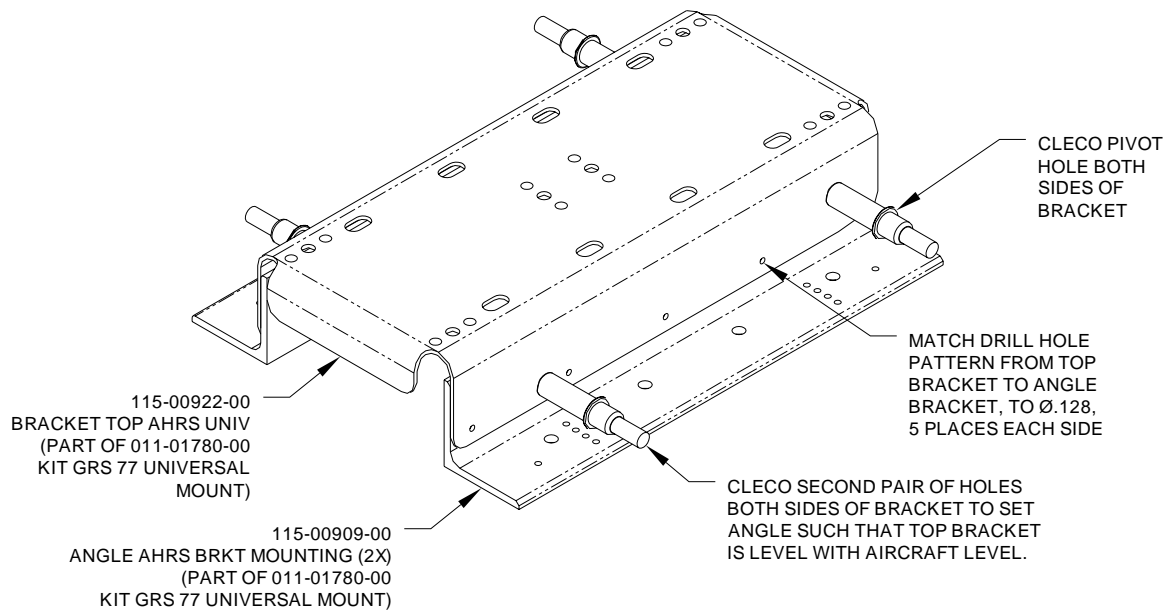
Hole-Pattern Configuration to Set Incline in Assembly of Aircraft Level
